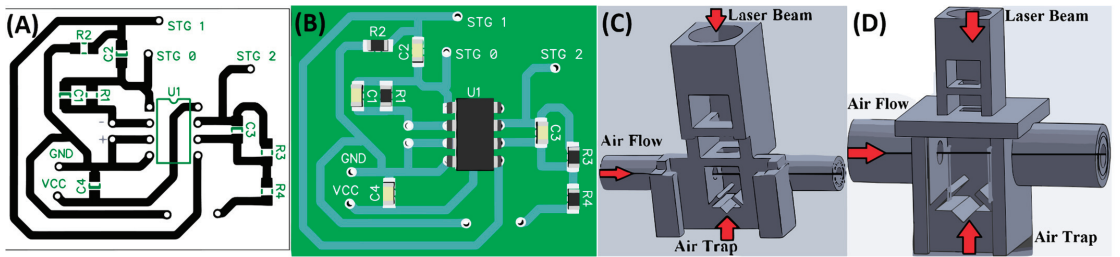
PCB and optical stage chambers designs. (A) PCB traces of optical stage and amplification, (B) 3D PCB design, (C) 3 × 3 mm PM flow chamber and (D) 9 × 9 mm PM flow chamber.
